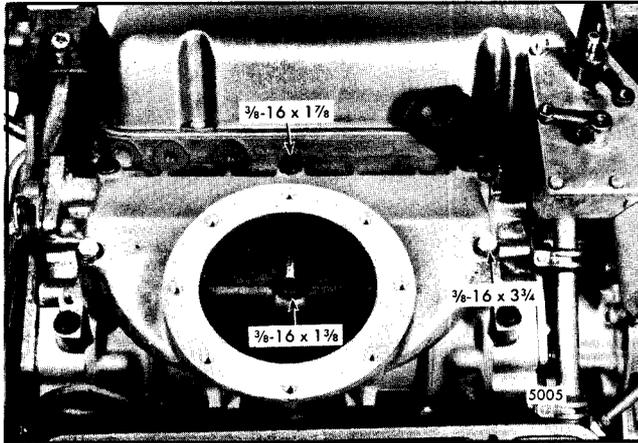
Location of Air Shutdown Housing Mounting Bolts (6V-53 Engines)
